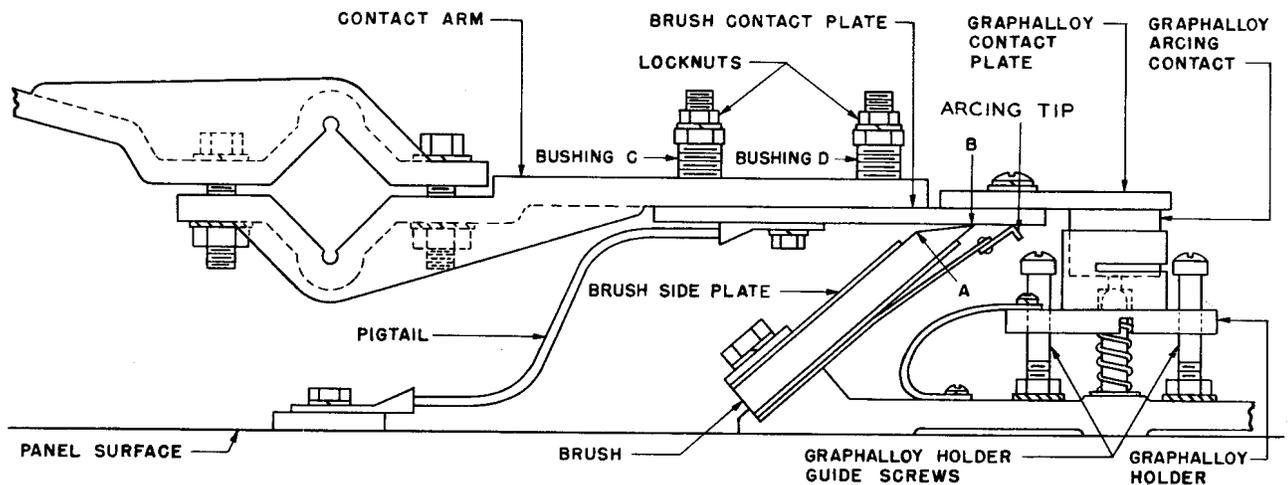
Contact Adjustment for Laminated-Type Contacts and
